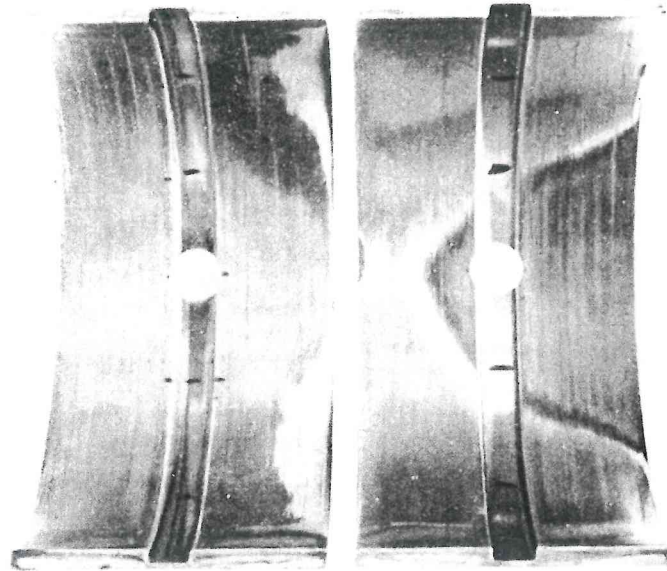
Bearing pattern due to misalignment. (Courtesy of Glacier Metal Company Ltd., Wembley, England.)
